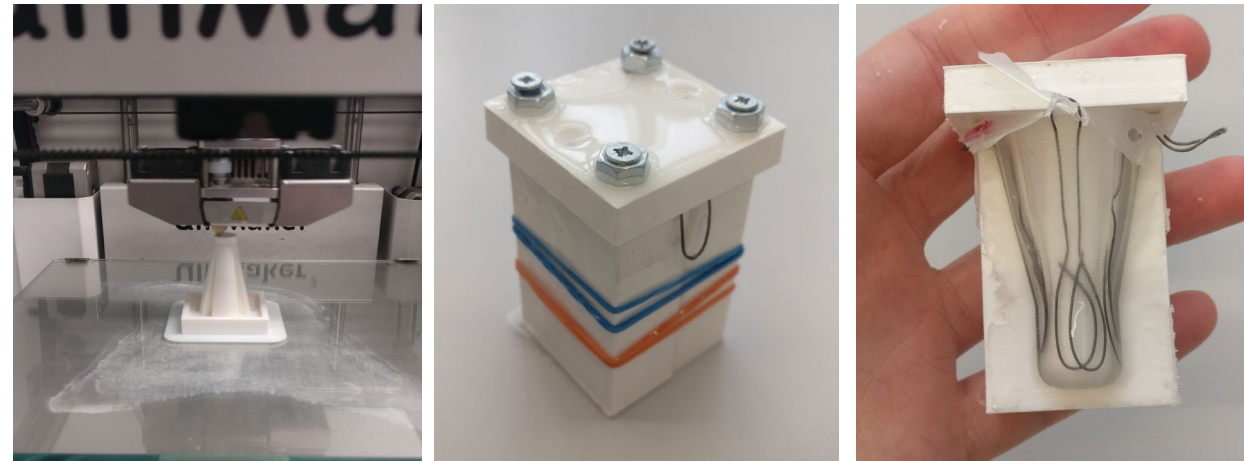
Part of mould 3D printed by an Ultimaker 2+ with PLA. Figure 9.23 Mould after silicone poured into and secured with screws. Figure 9.24 Mould after opening, prototype with SMA wire inside.
